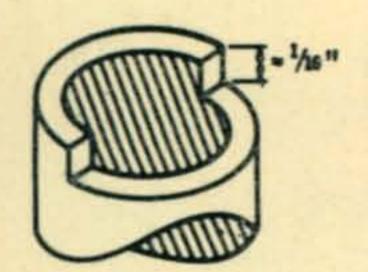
Sketch of the center section (only) of the cup core showing the shoulder used for inductance adjustment.
